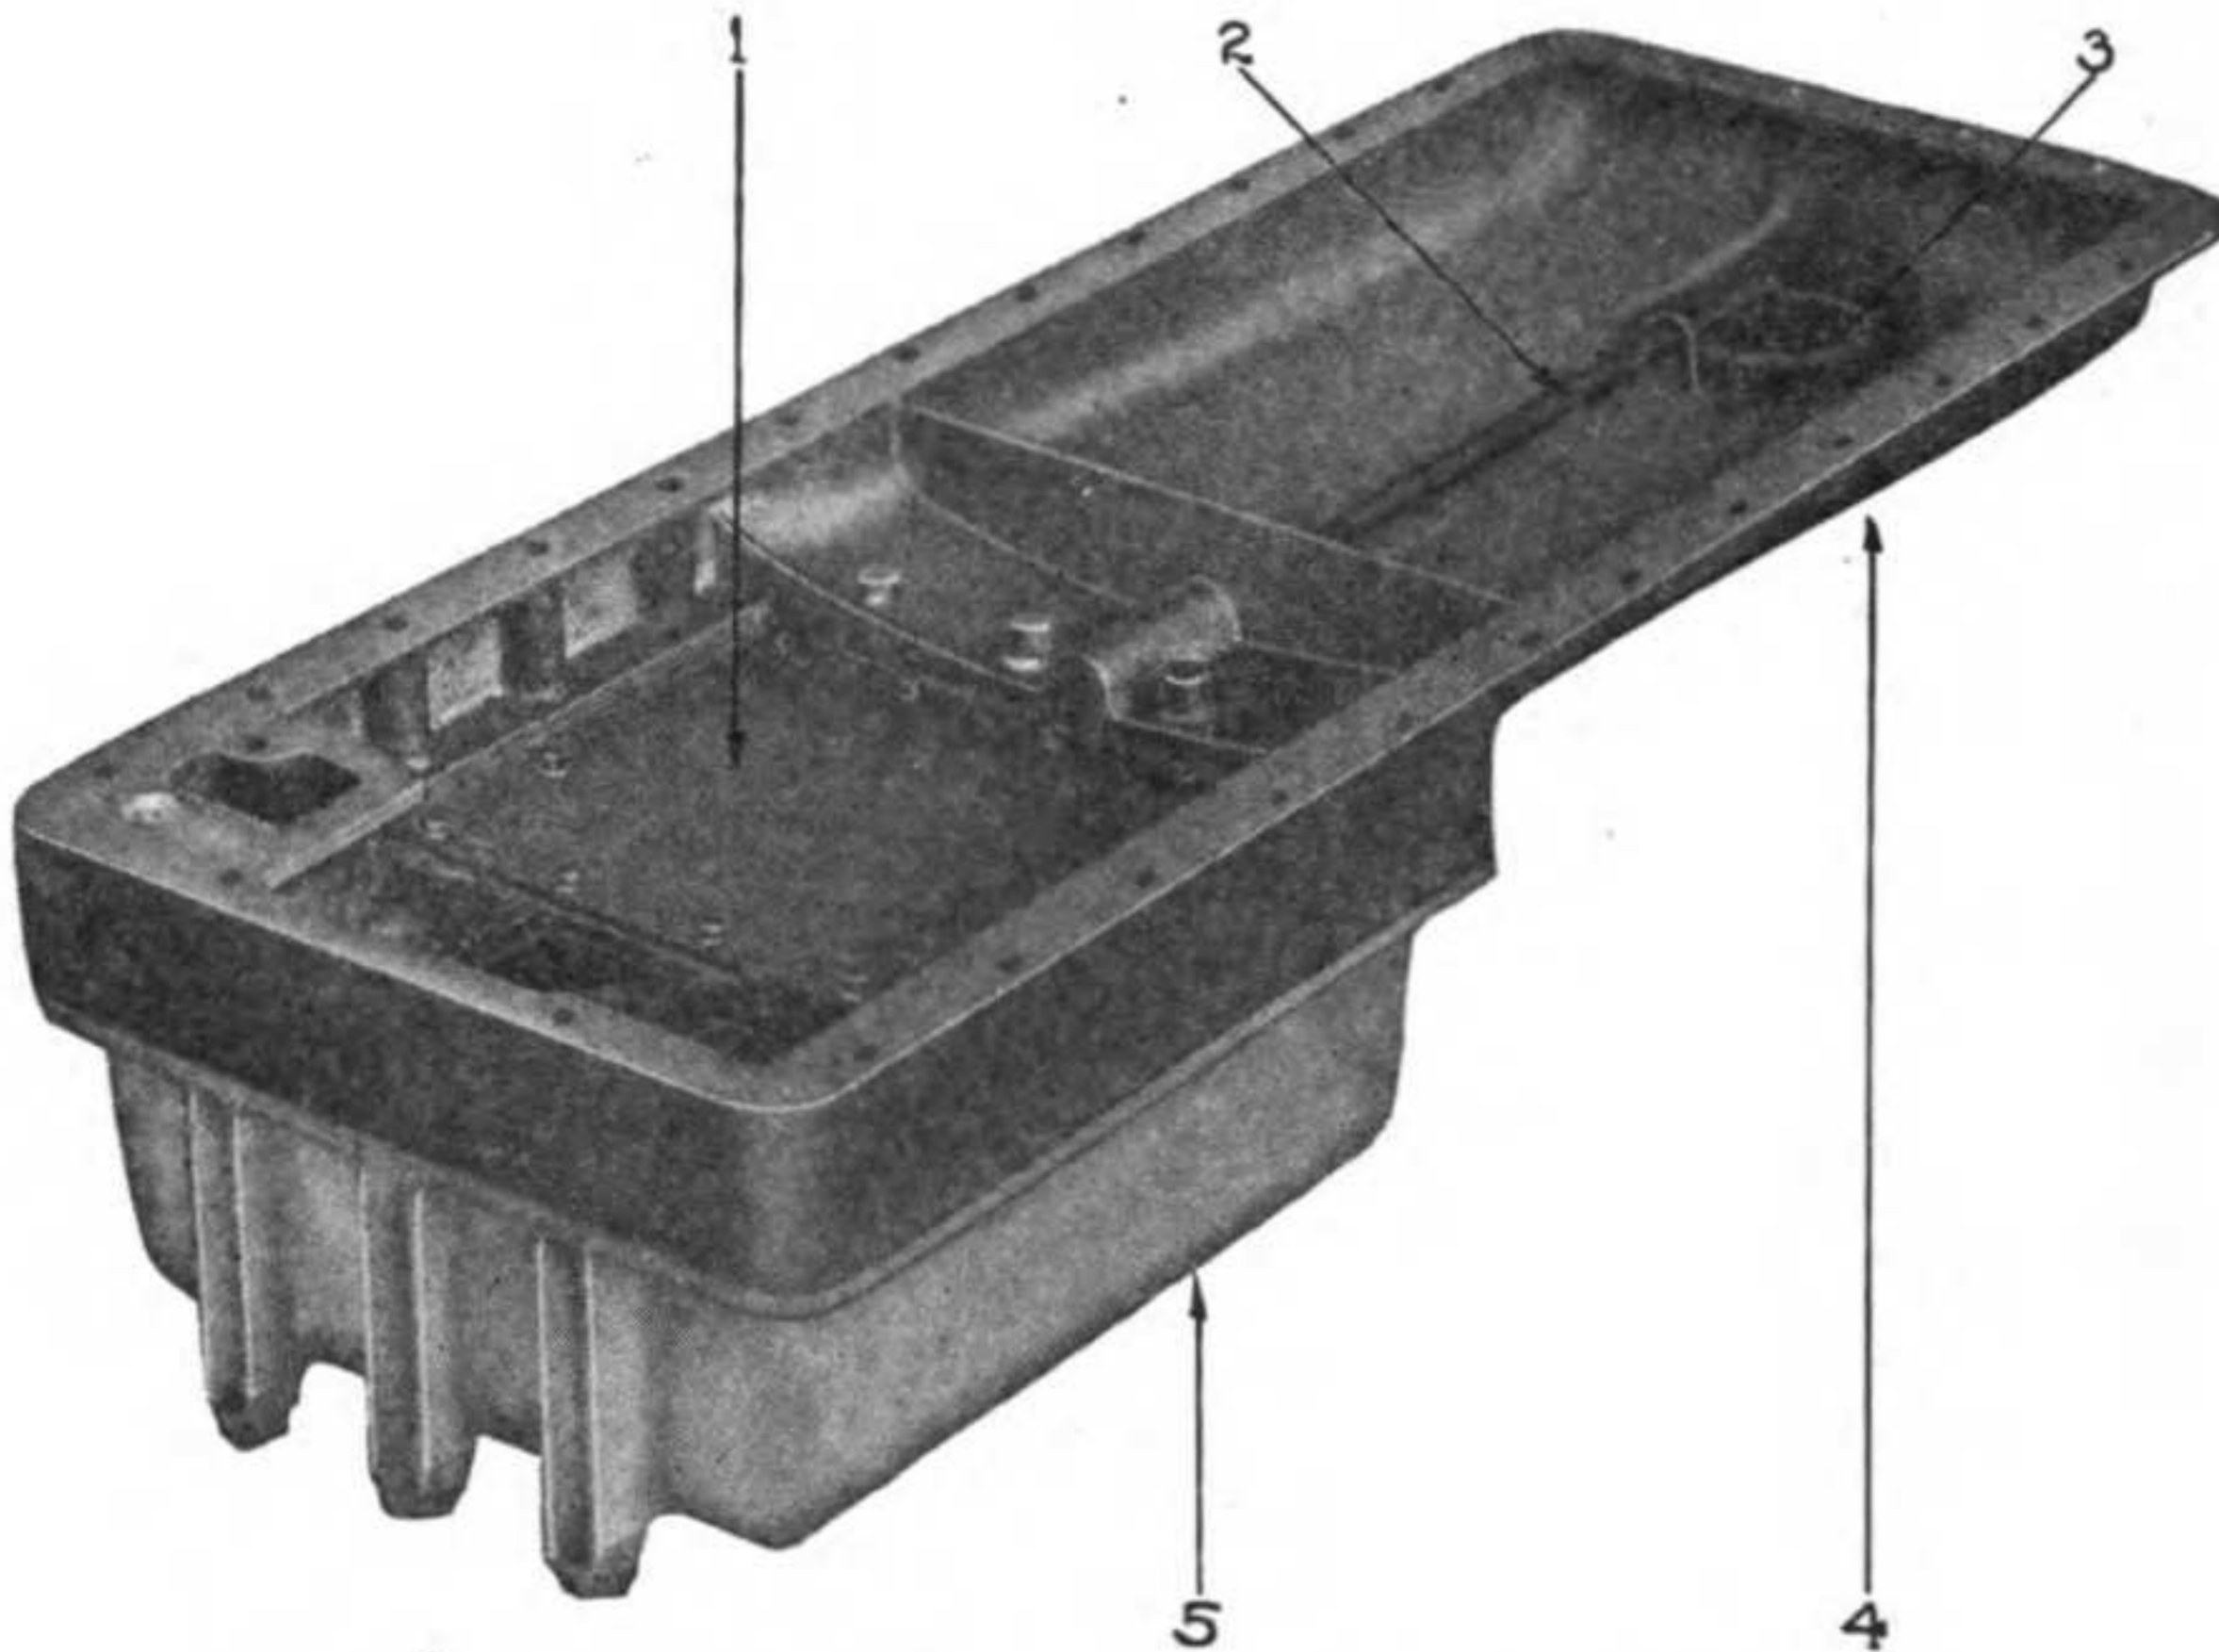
CRANKCASE ASSEMBLY OIL PANS
